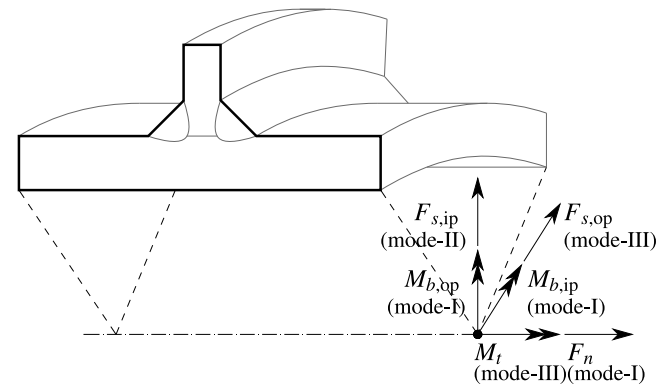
DS welded T-joint in a tubular structure with internal load components.
